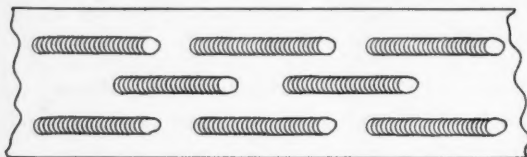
Weld metal should be deposited in short lengths and then allowed to cool.
